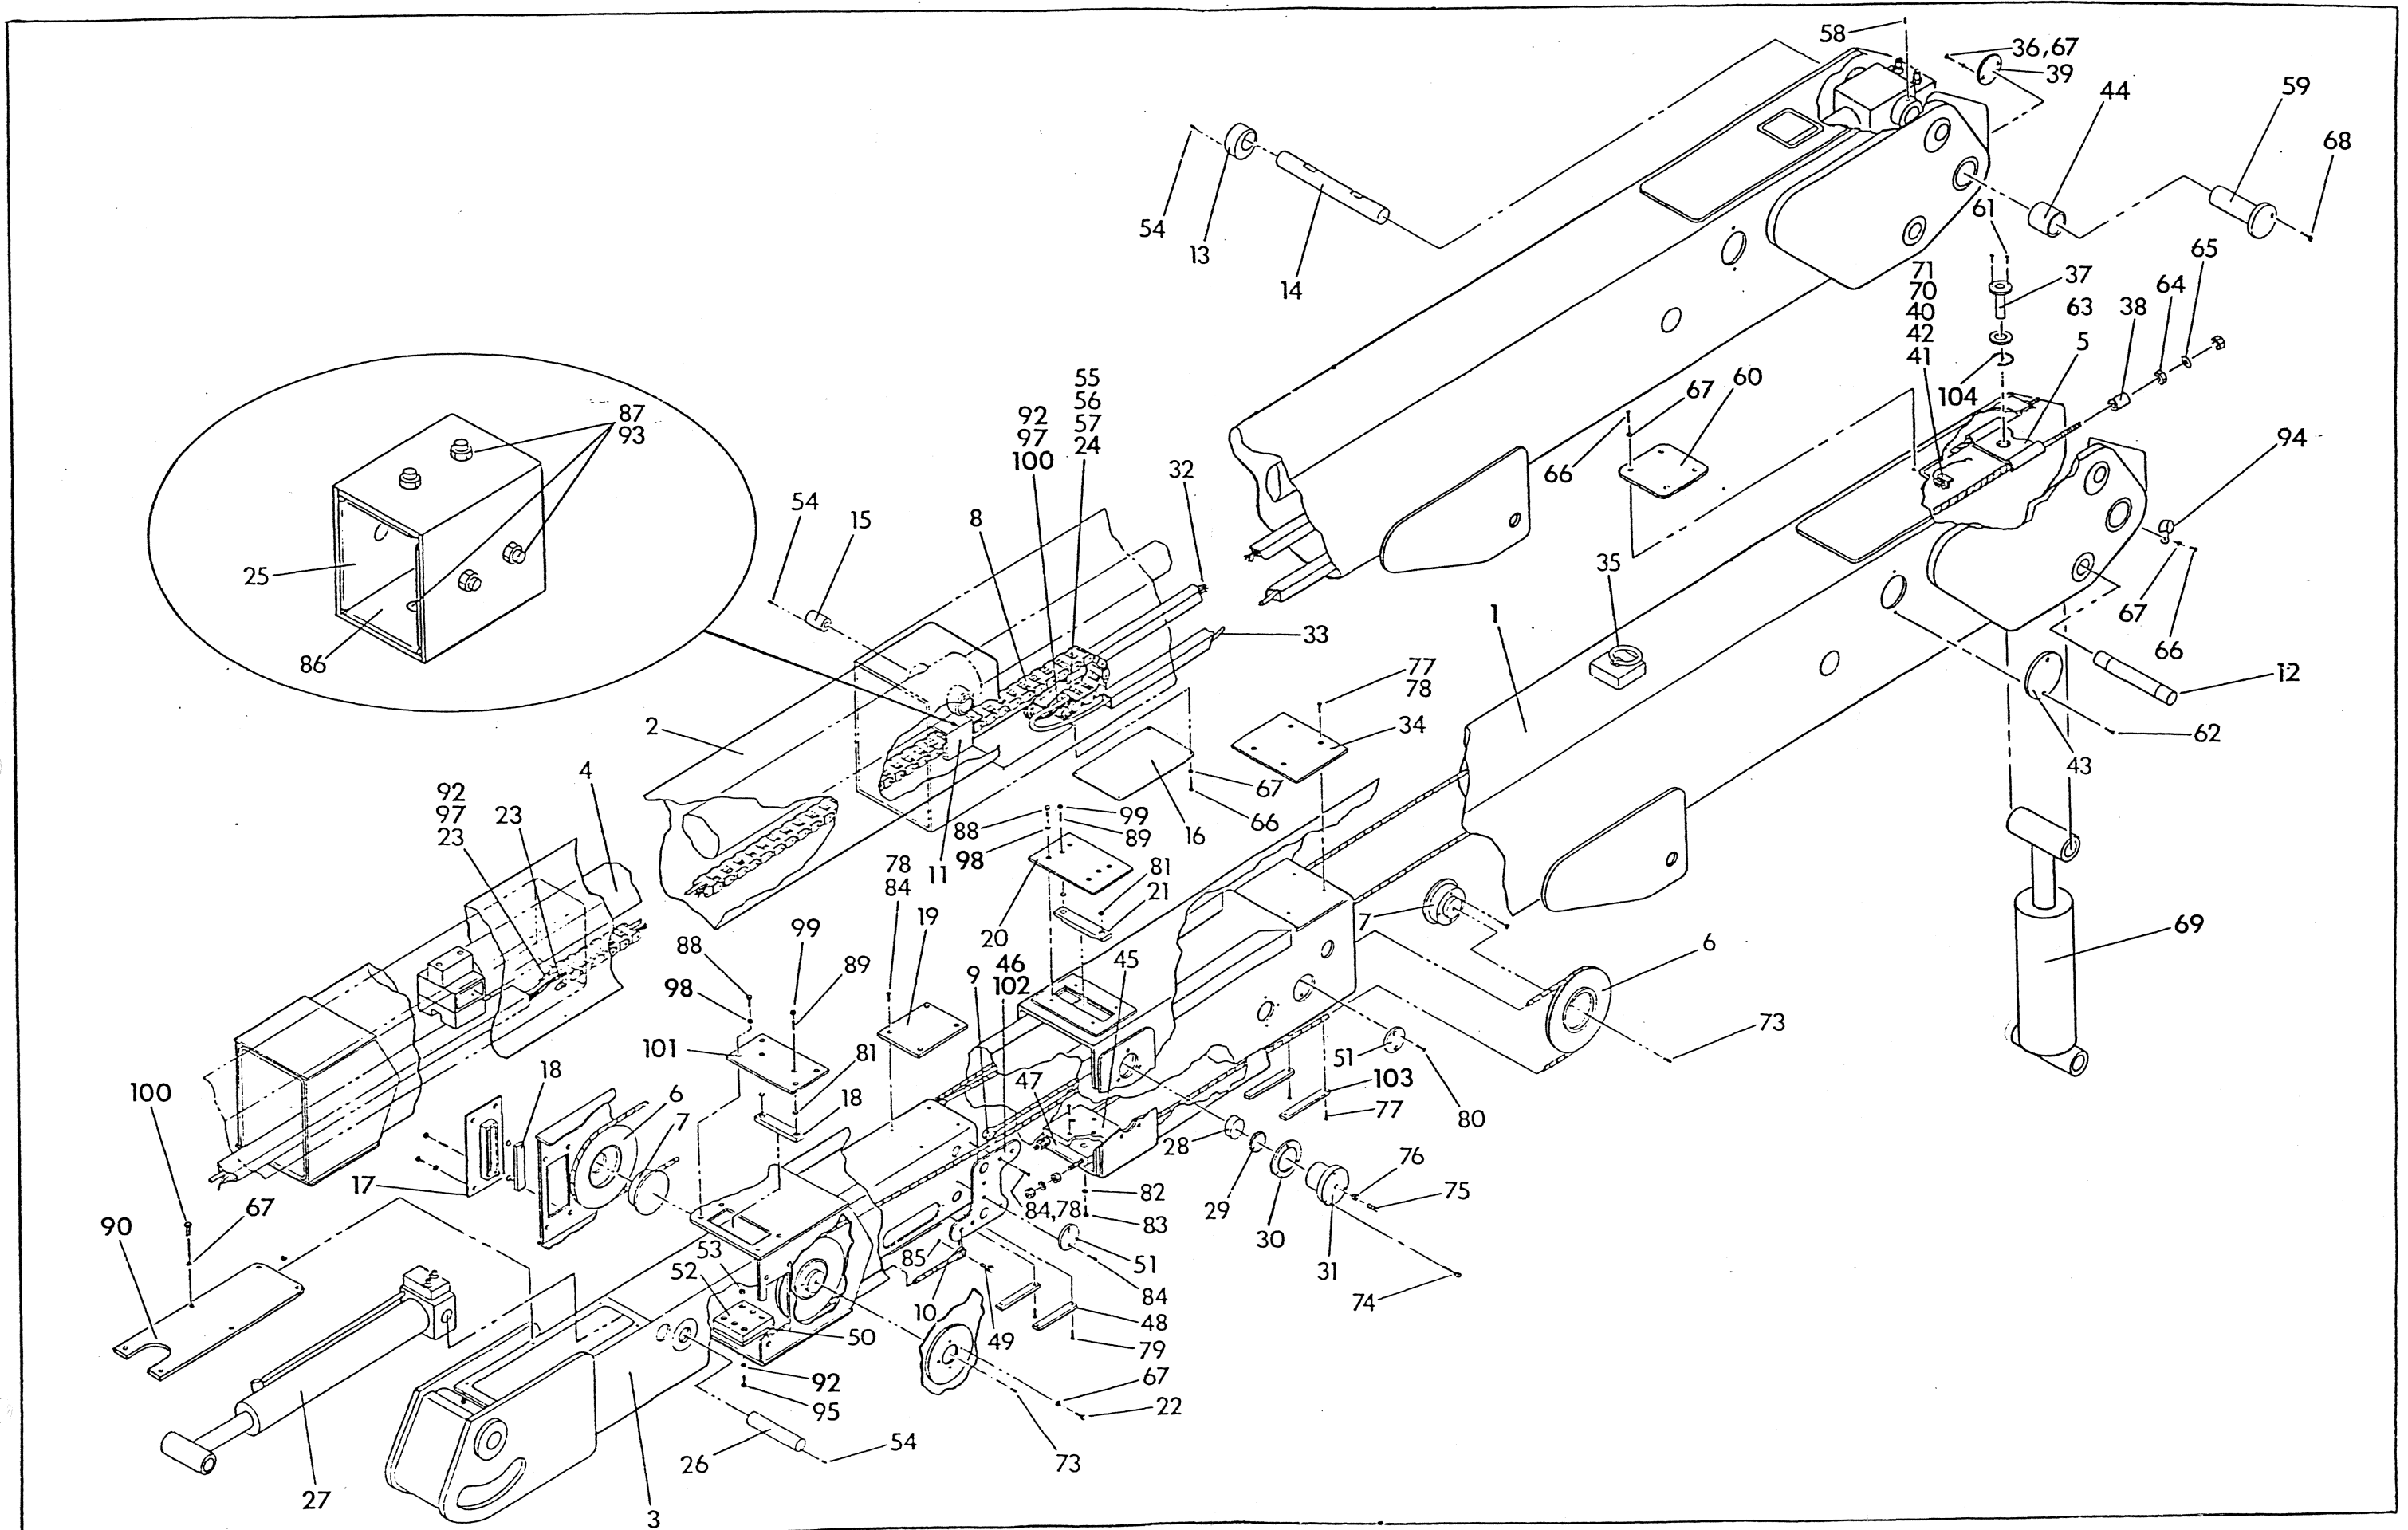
FINAL ASSEMBLY (2-Section Boom)
